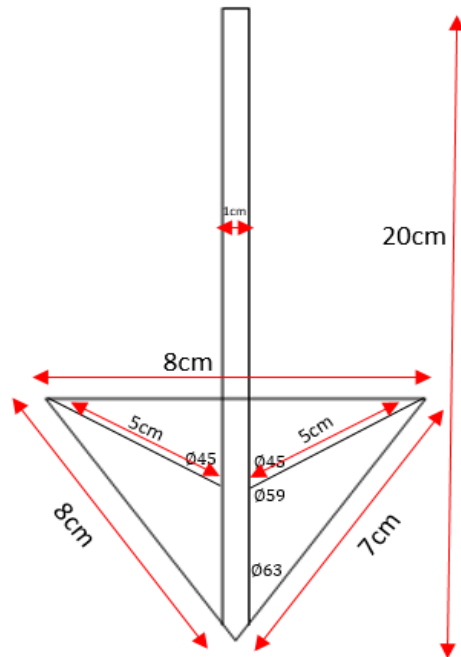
shows the front view of the locally manufactured triangular blades (T3).
